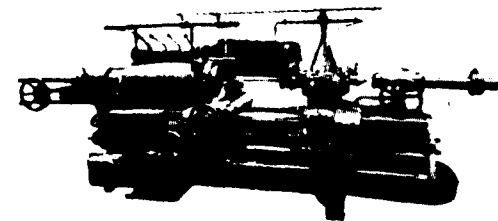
No. 7 Staybolt Turret Lathe equipped for producing roof staybolts from bar.
